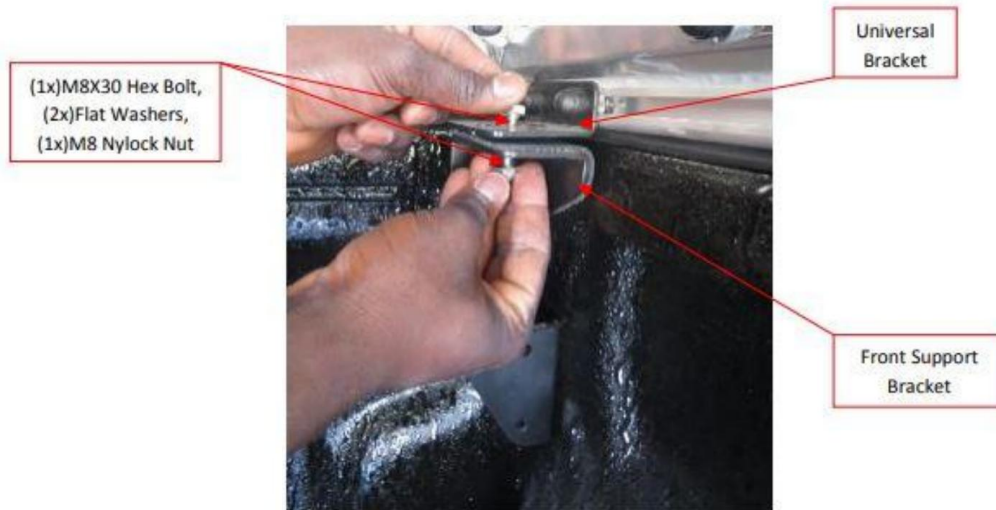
Inserting Bolt for Universal-Front Right Support Bracket
